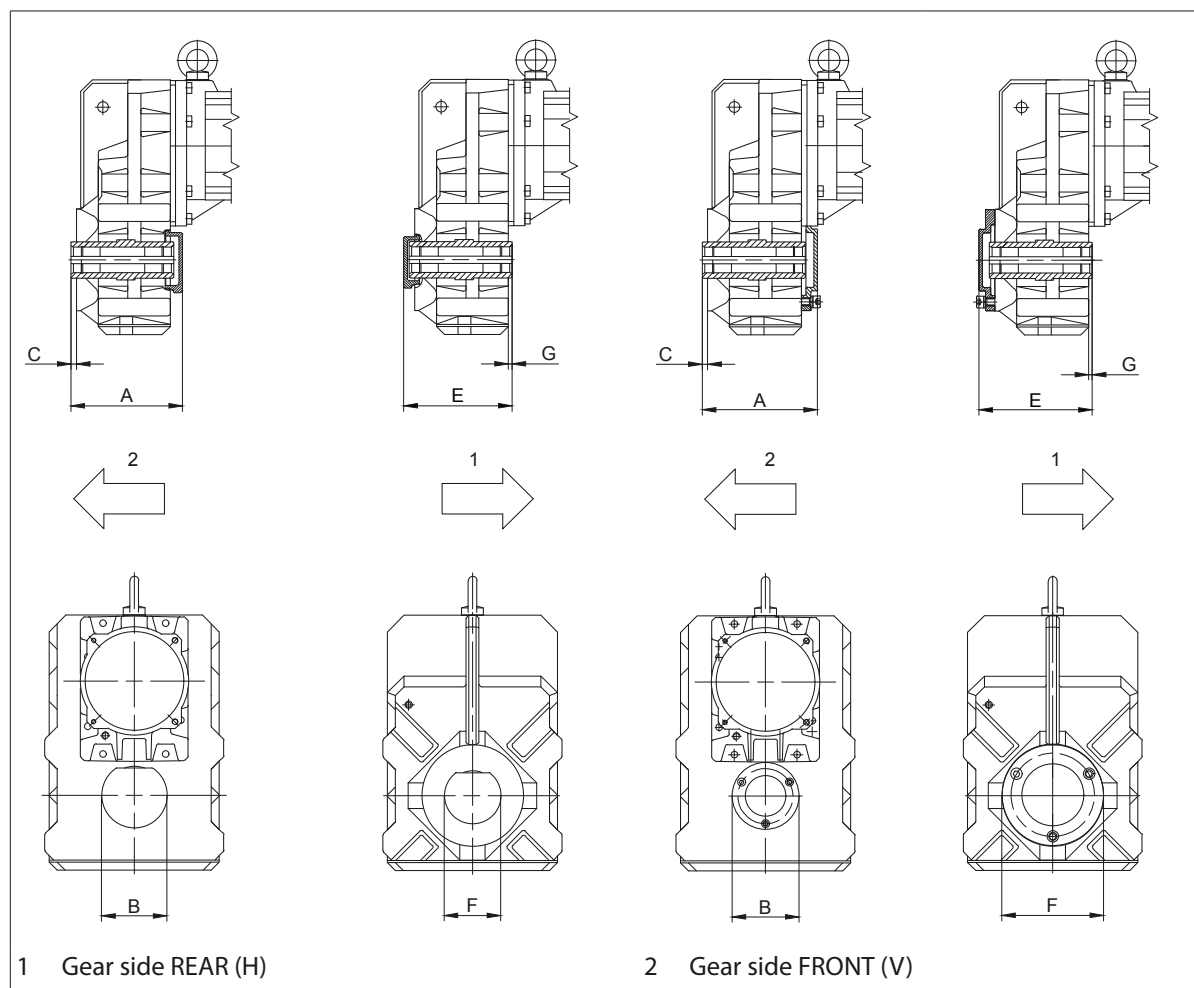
SSV cover for shaft-mounted gearbox BF10 ... BF90
